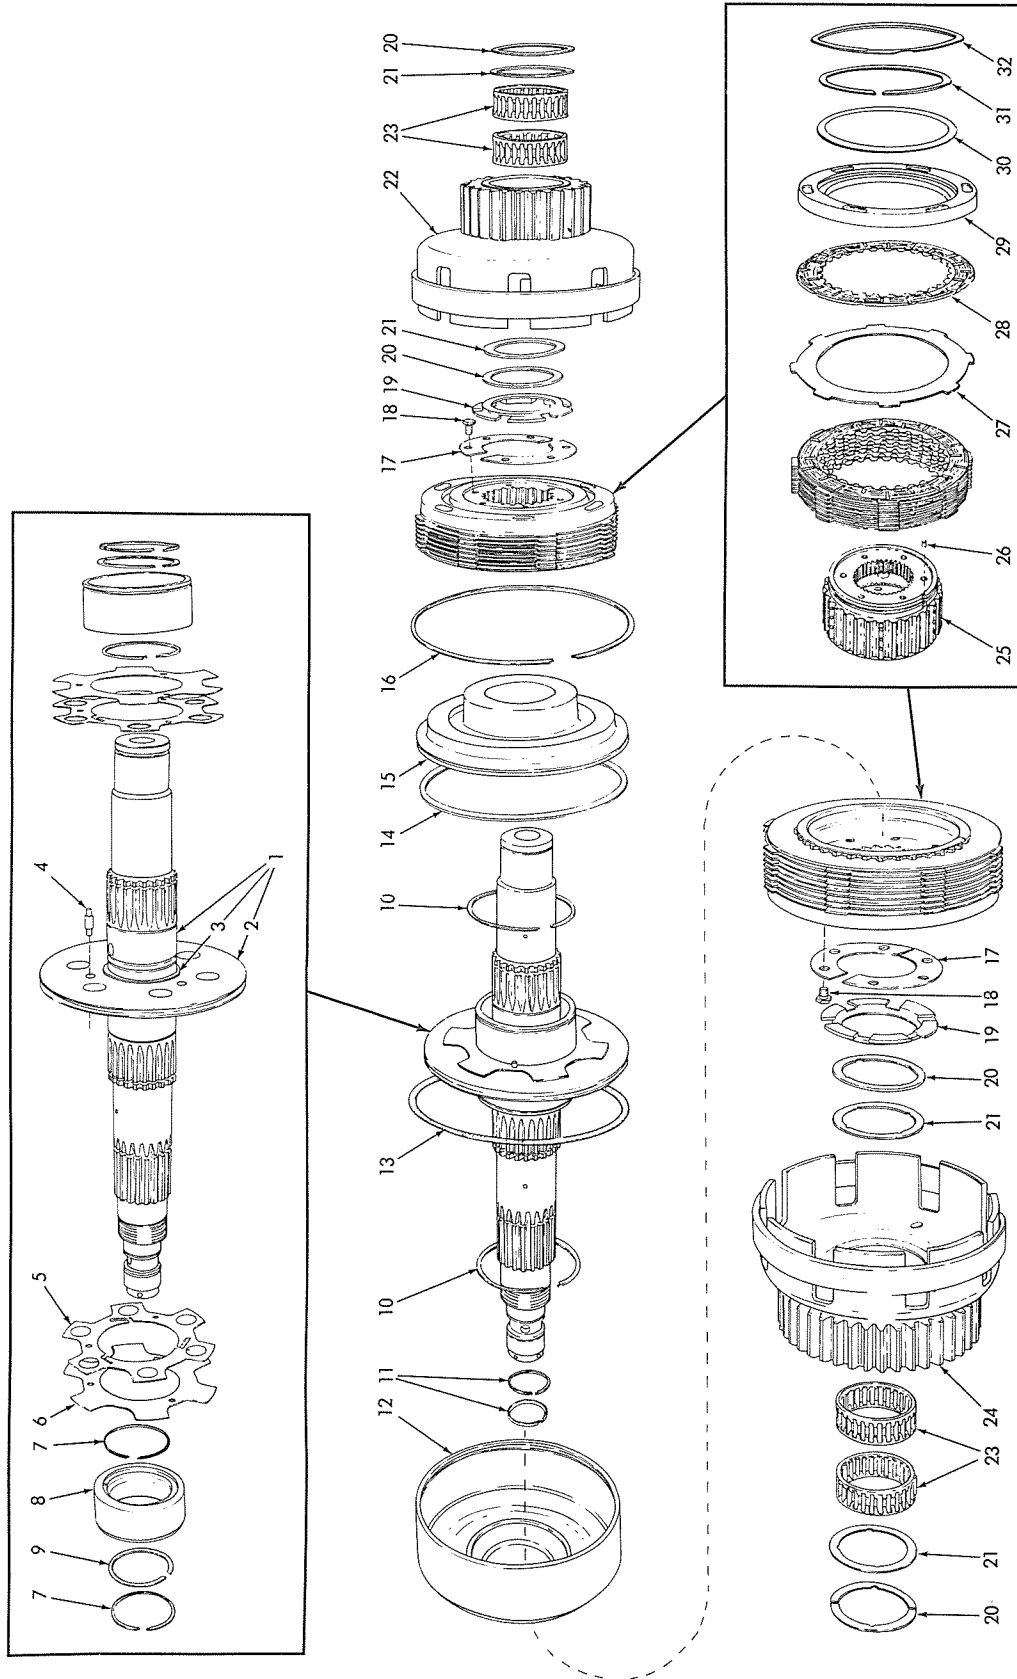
CLUTCH SHAFT ( T - 72362 )
